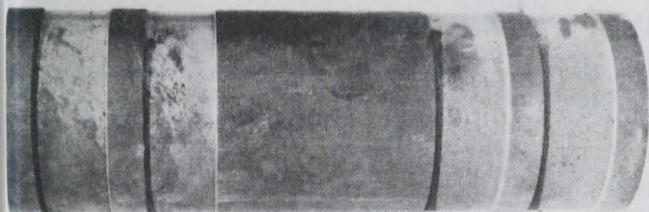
Eighteen-inch steel sleeve used for connecting clam jetting hose aboard the Delaware.
